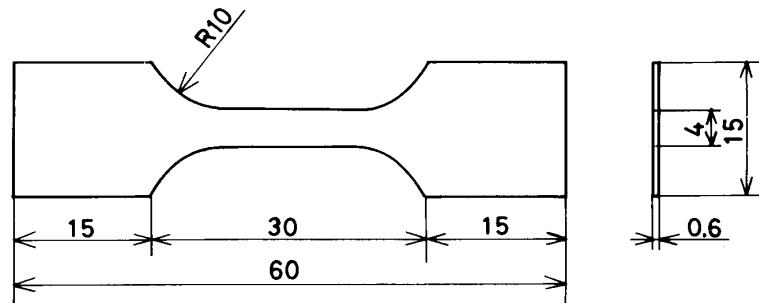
Dimensions (mm) of the specimen for the fatigue test
